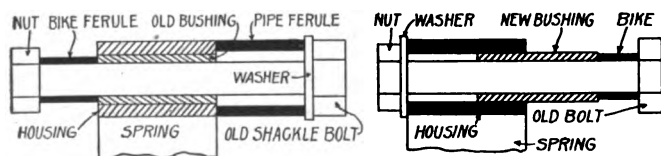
How the Old Bushing Was Removed and the New One Forced In.
